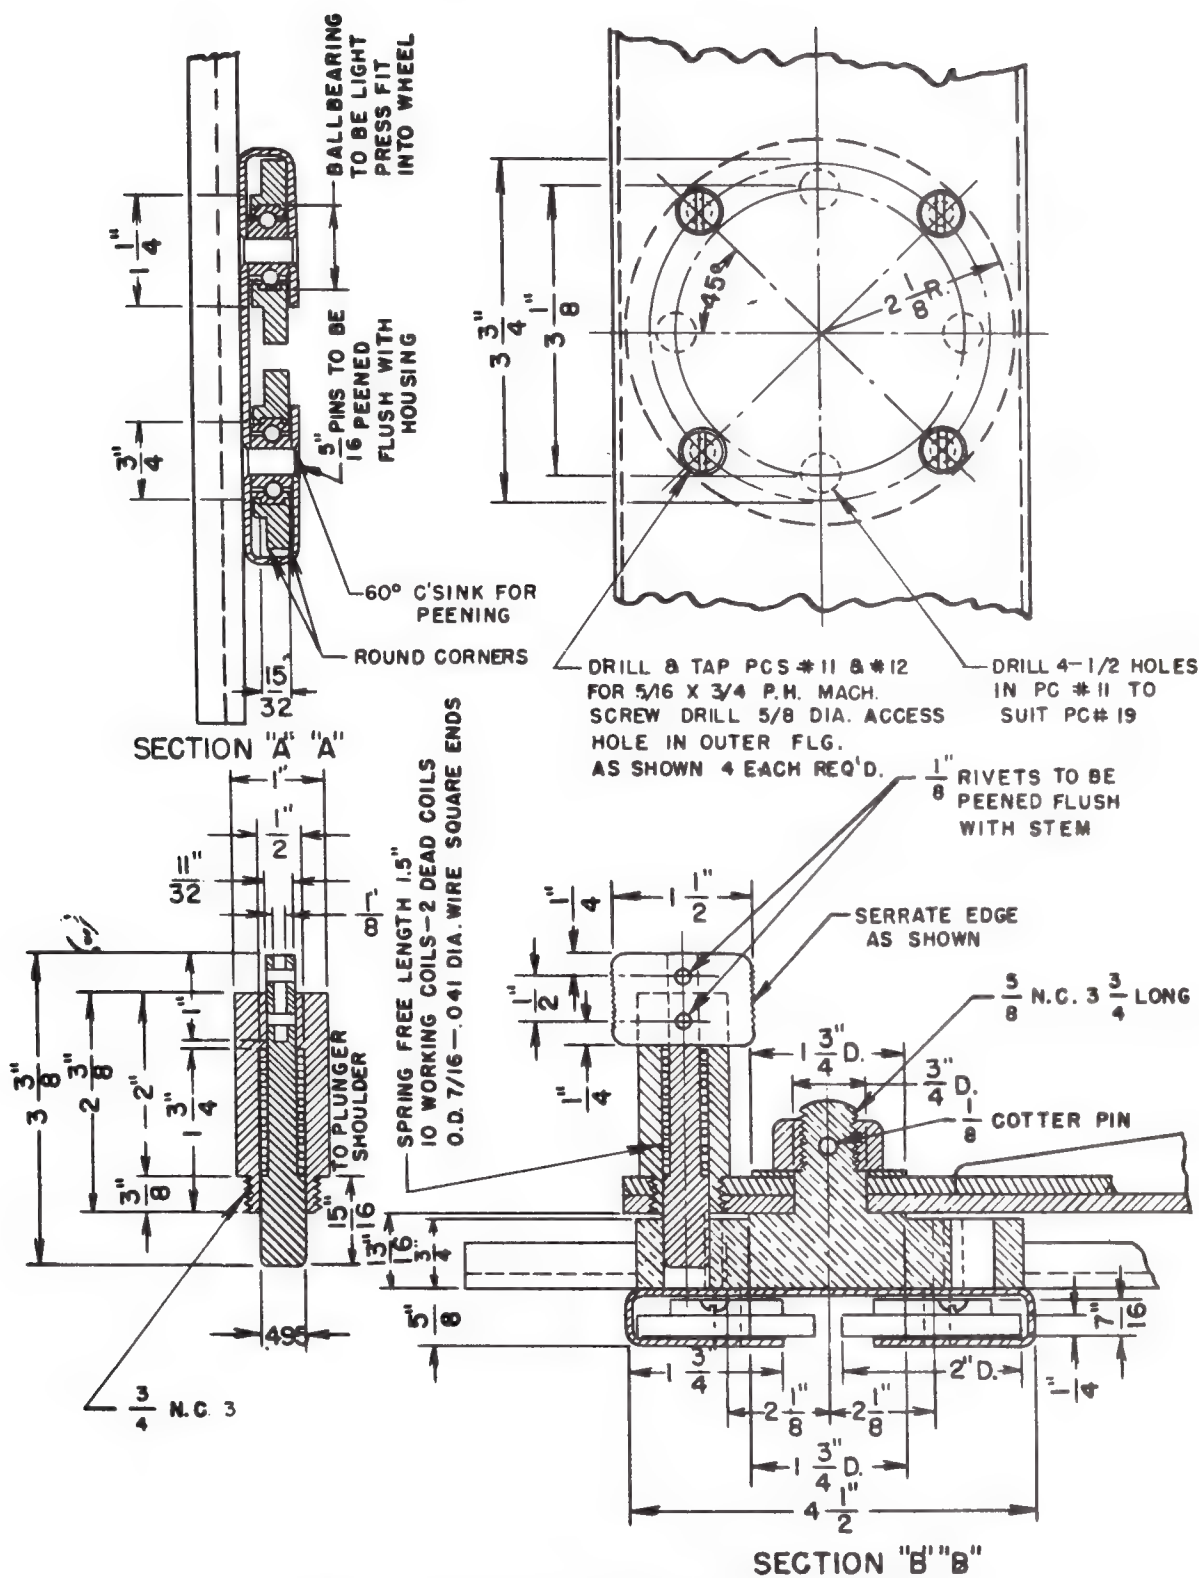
Construction Details For TDZ Test Rack (Cont.)
